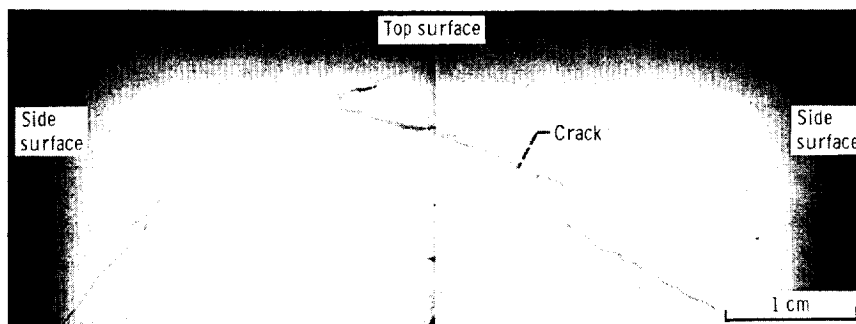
Cross section of gear tooth from unrun modified Vasco X-2 gear showing crack formation.
